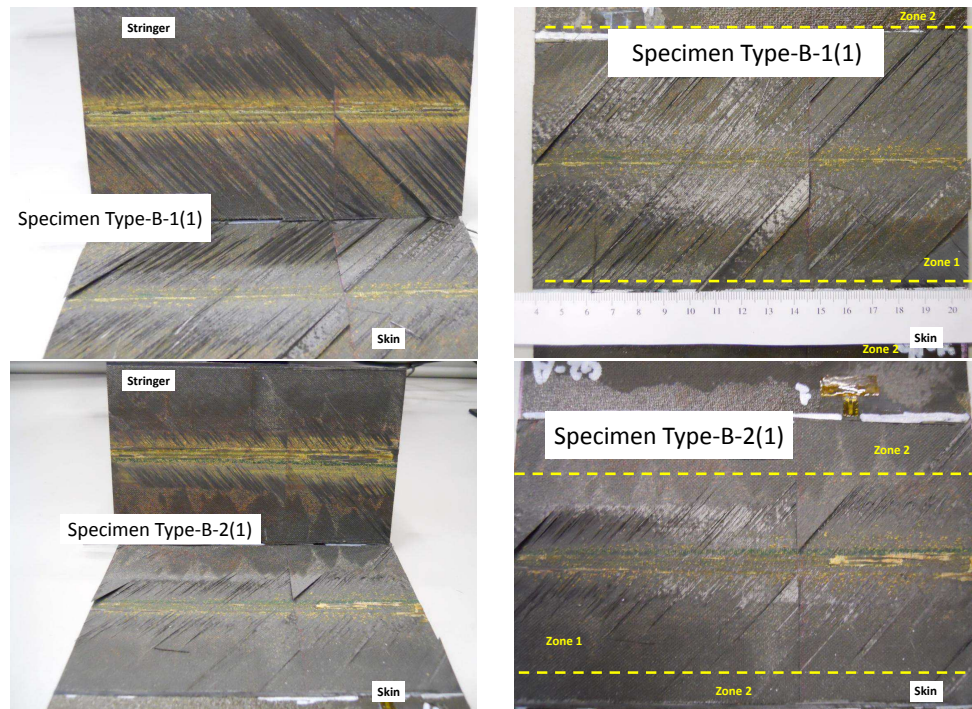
Fracture surfaces after test: Type-B-1(1) specimen and Type-B-2(1) specimen
